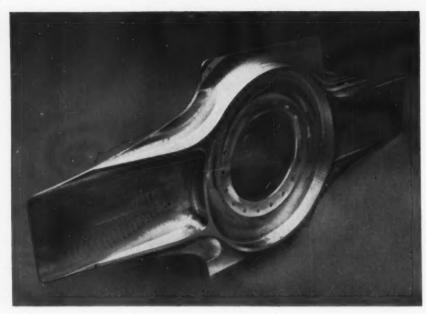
Component for jet airplane on which 235 hours of tool design and fabrication time were saved by machining on numerically controlled equipment.
